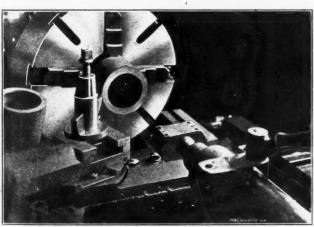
Facing the End, breaking the Inside Edge and boring out the Piston
